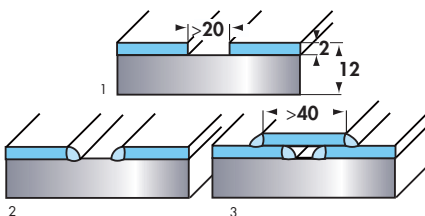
"Wallpapering" by GTA cold wire or hot wire welding "with cover strips".
